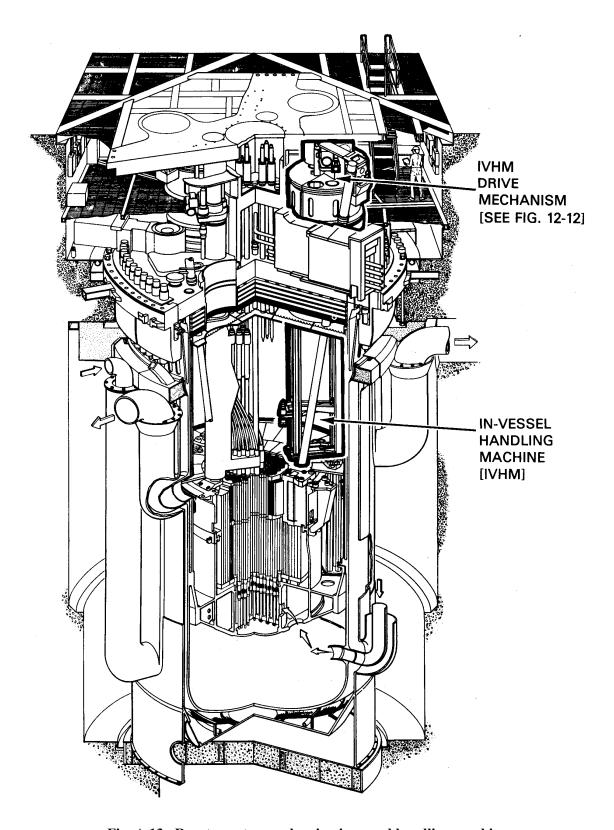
Reactor cutaway showing in-vessel handling machines.
